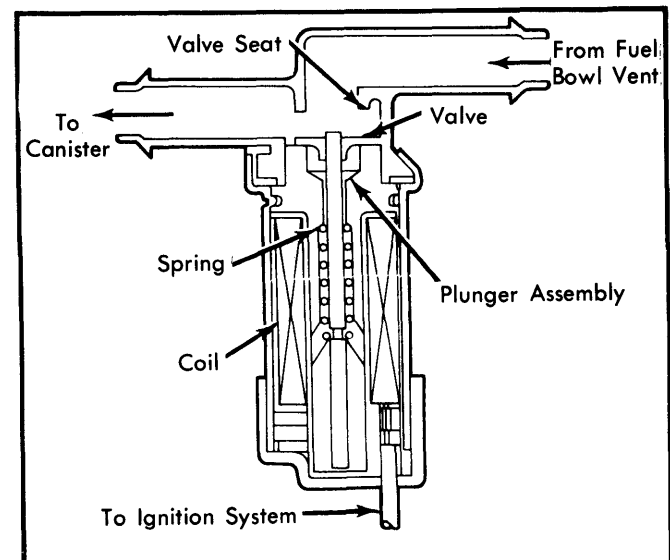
Cutaway View of Fuel Bowl Solenoid Vent Valve
